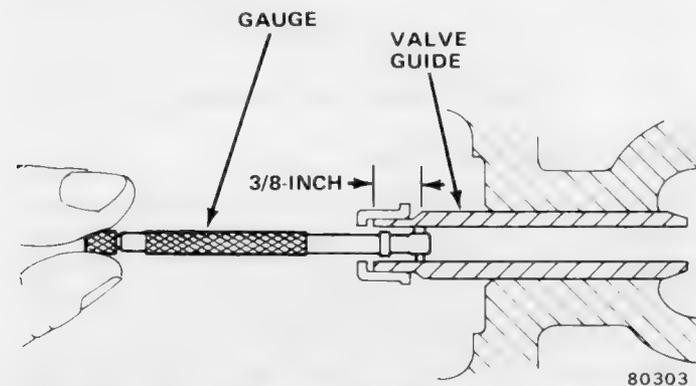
B-74 Measuring Valve Guide with Telescoping Gauge
